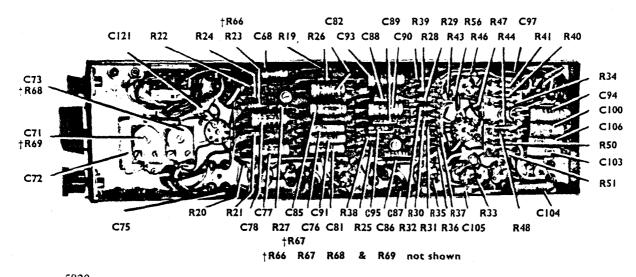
IF AMPLIFIER UNIT. UNDERSIDE VIEW OF CHASSIS SHOWING LOCATION OF COMPONENTS
